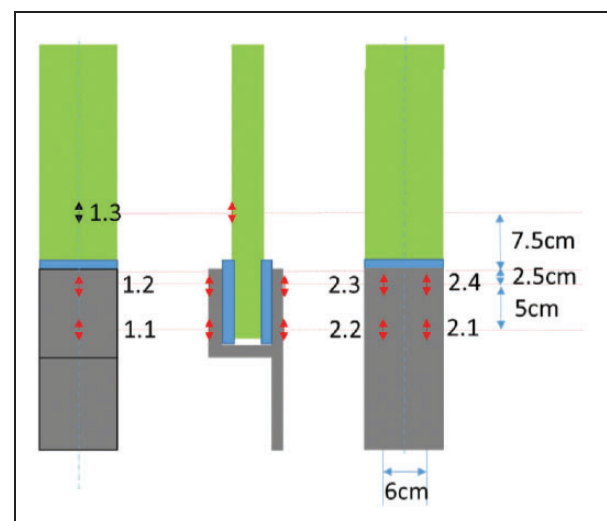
Locations of FBG sensors on composite skin (1.3) and steel flange (front side 1.2 and 1.1) (back side 2.1 to 2.4).
